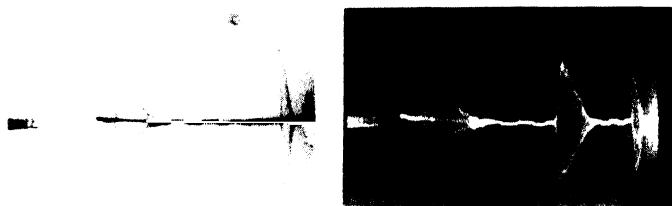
(A) An oscilloscope pattern which has been recorded from the apparatus shown in Fig. 8. This pattern indicates the material to be flawless. (B) This pattern indicates a flaw in the material.
